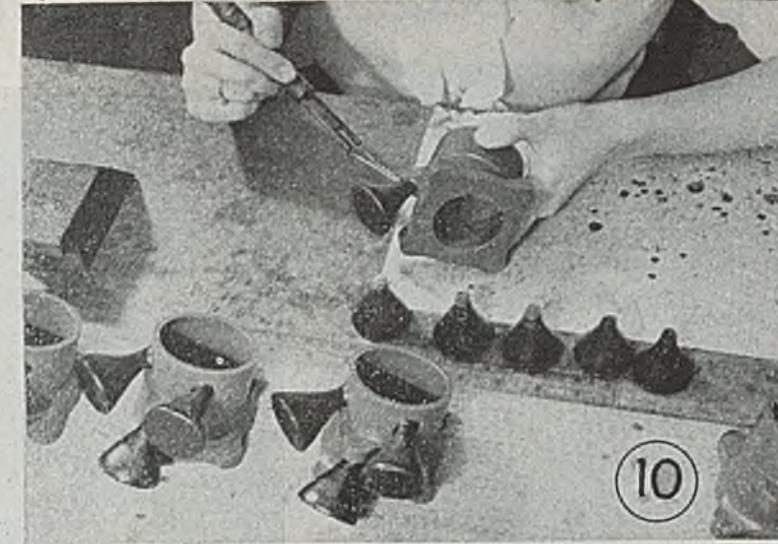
This operator is welding blind risers to the wax patterns. Such risers provide assurance that the metal reaches all parts of the mold and take care of shrinkage
